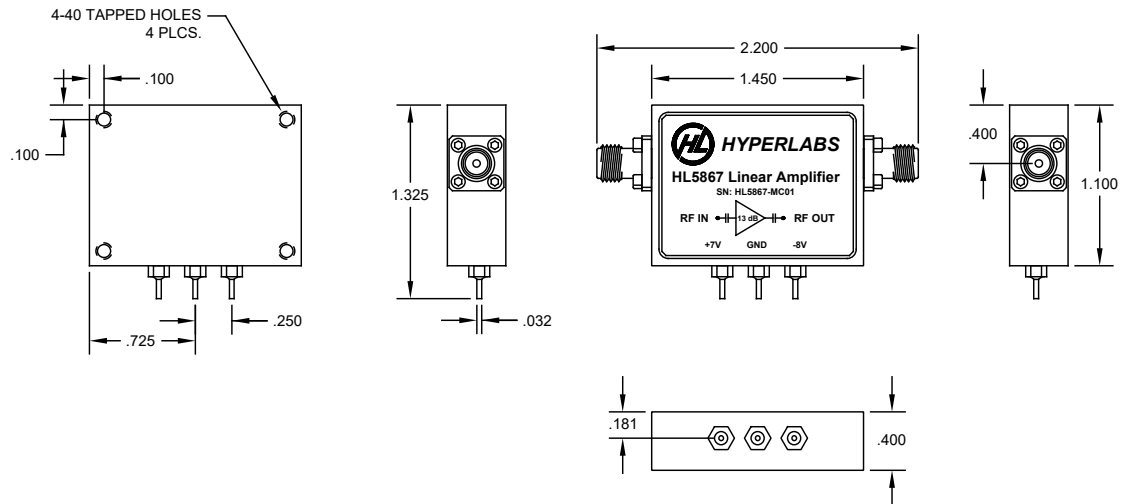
HL5867 mechanical drawing (opt. -29-JJ), inches
